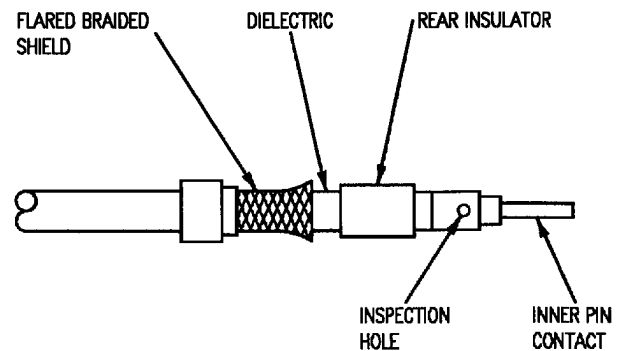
M39029/ 77-428 Coaxial Assembly Procedure (Sheet 1)
